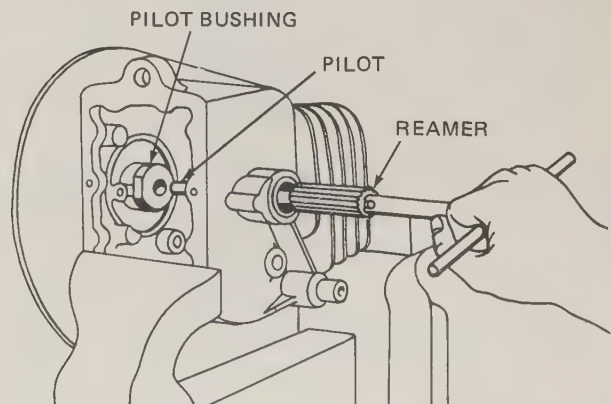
Using a pilot and guide bushing in the original bearing to ream a newly installed sleeve bearing. (Briggs & Stratton Corporation)
